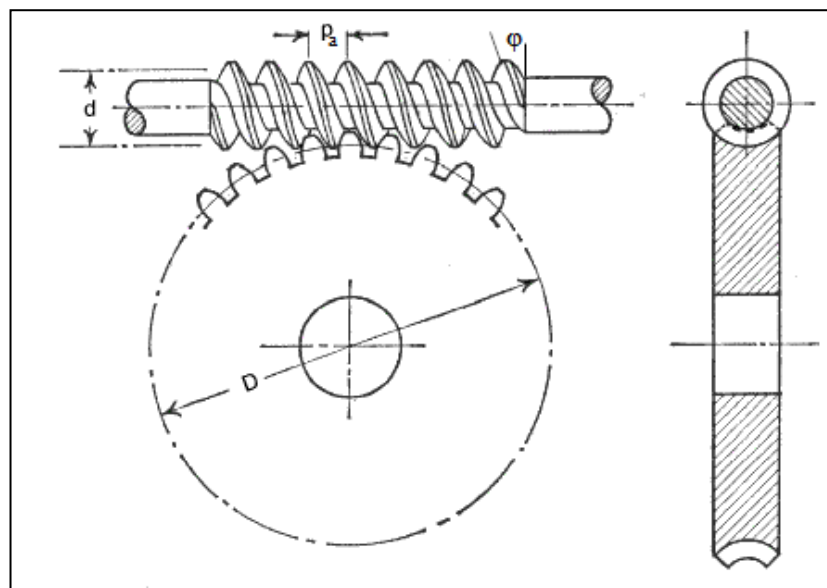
More detailed view a straight worm and hobbed wheel gear (Beardmore, 2013)
